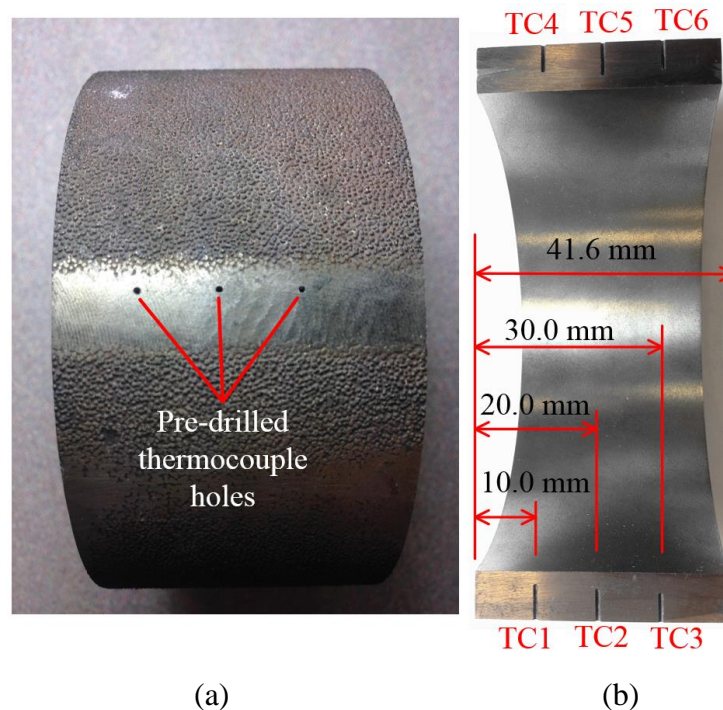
Six embedded thermocouples in the workpiece: (a) pre-drilled holes for thermocouple insertion and (b) cross-sectional view of the workpiece after cutting.
